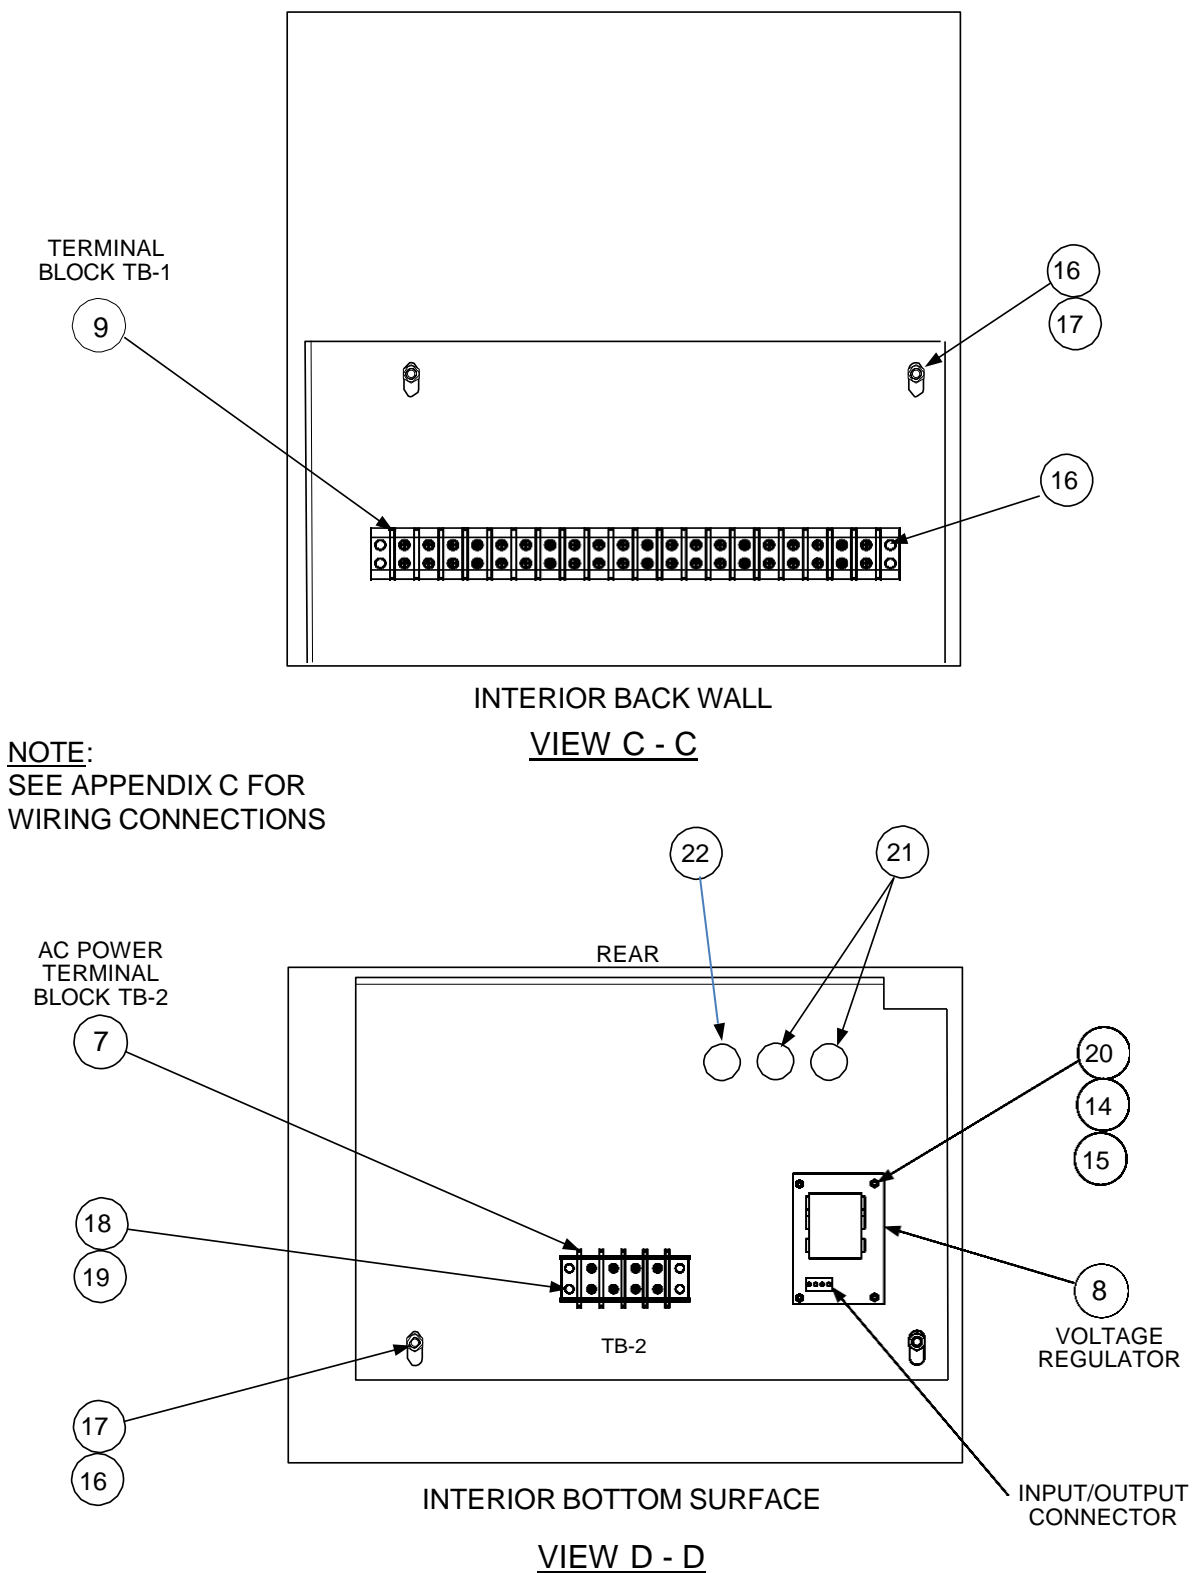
ECS Control Box Assembly Component Locations
